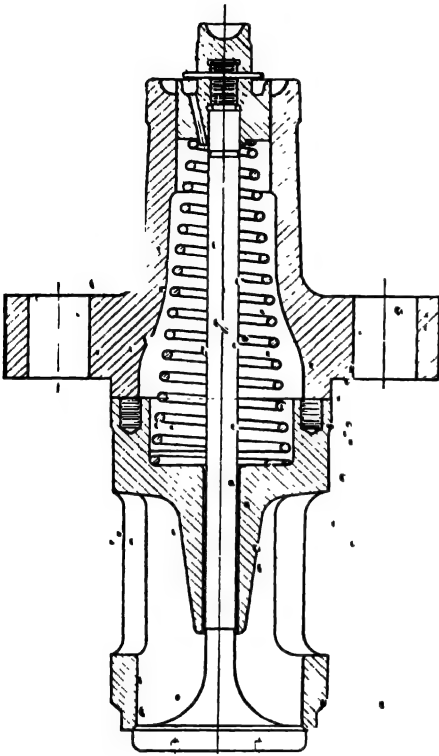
Mirreles Engine Inlet and Exhaust Valves
